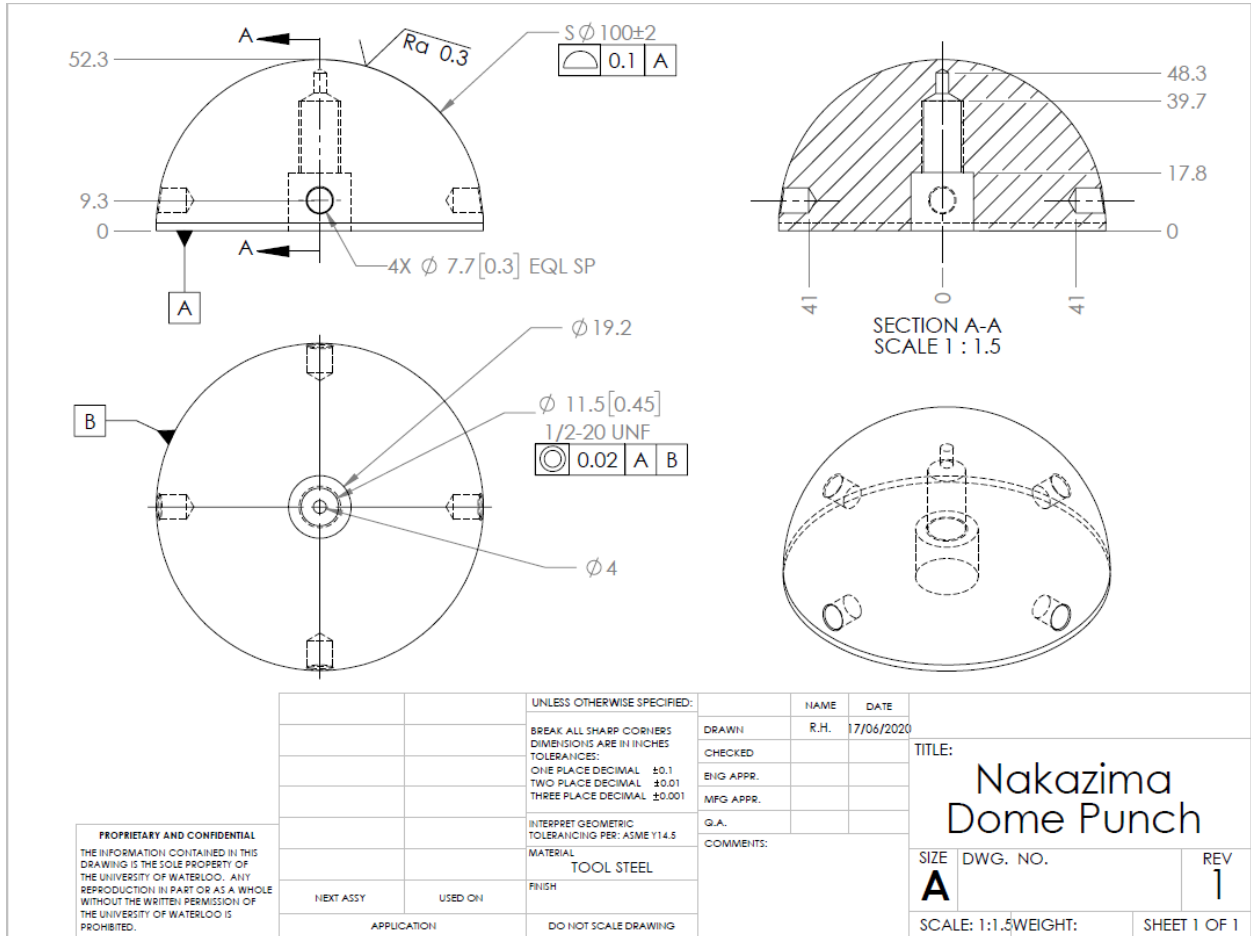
Nakazima dome punch geometry used in hot stamping tests. It is made of Uddeholm Dievar tool steel. All dimensions are in millimeters.
